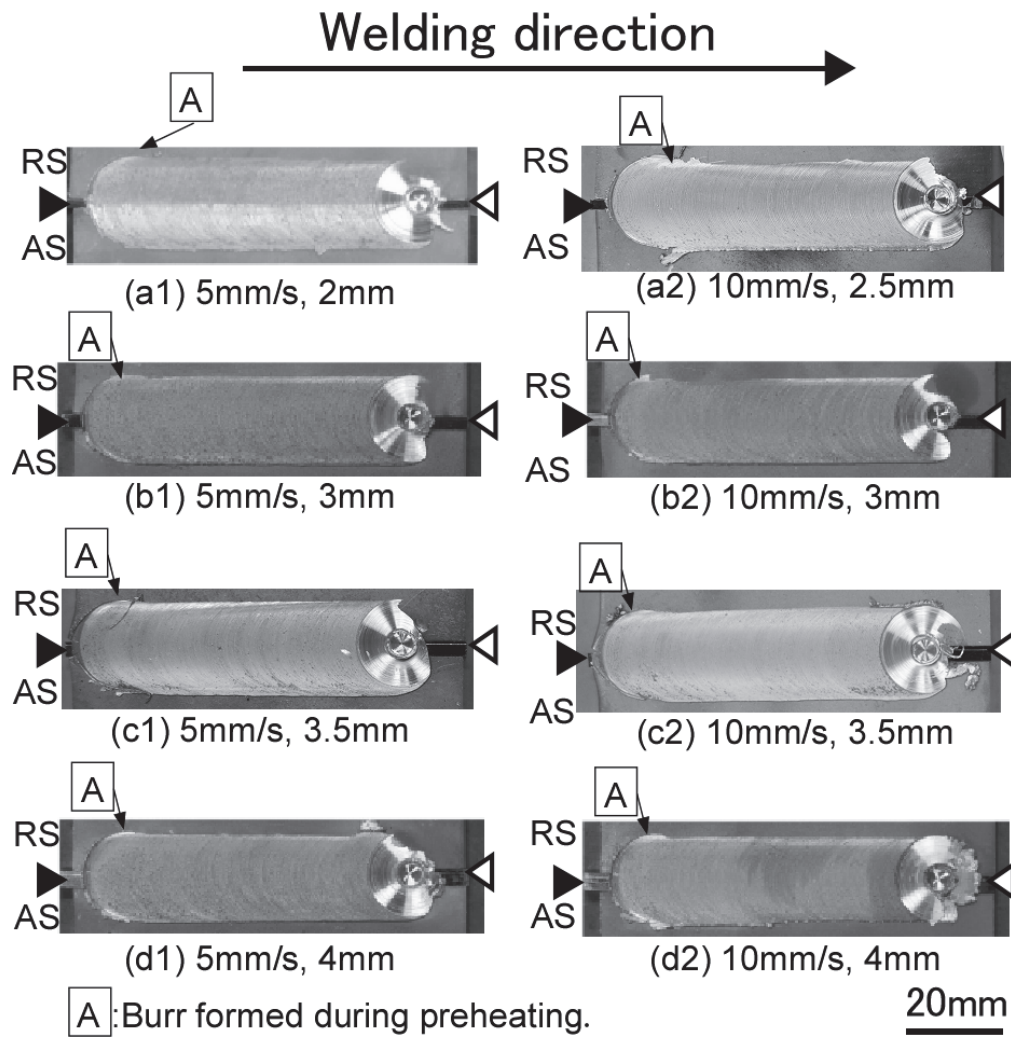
Appearances of FSW joints welded under various conditions. (With offset. $d=RS1$)
